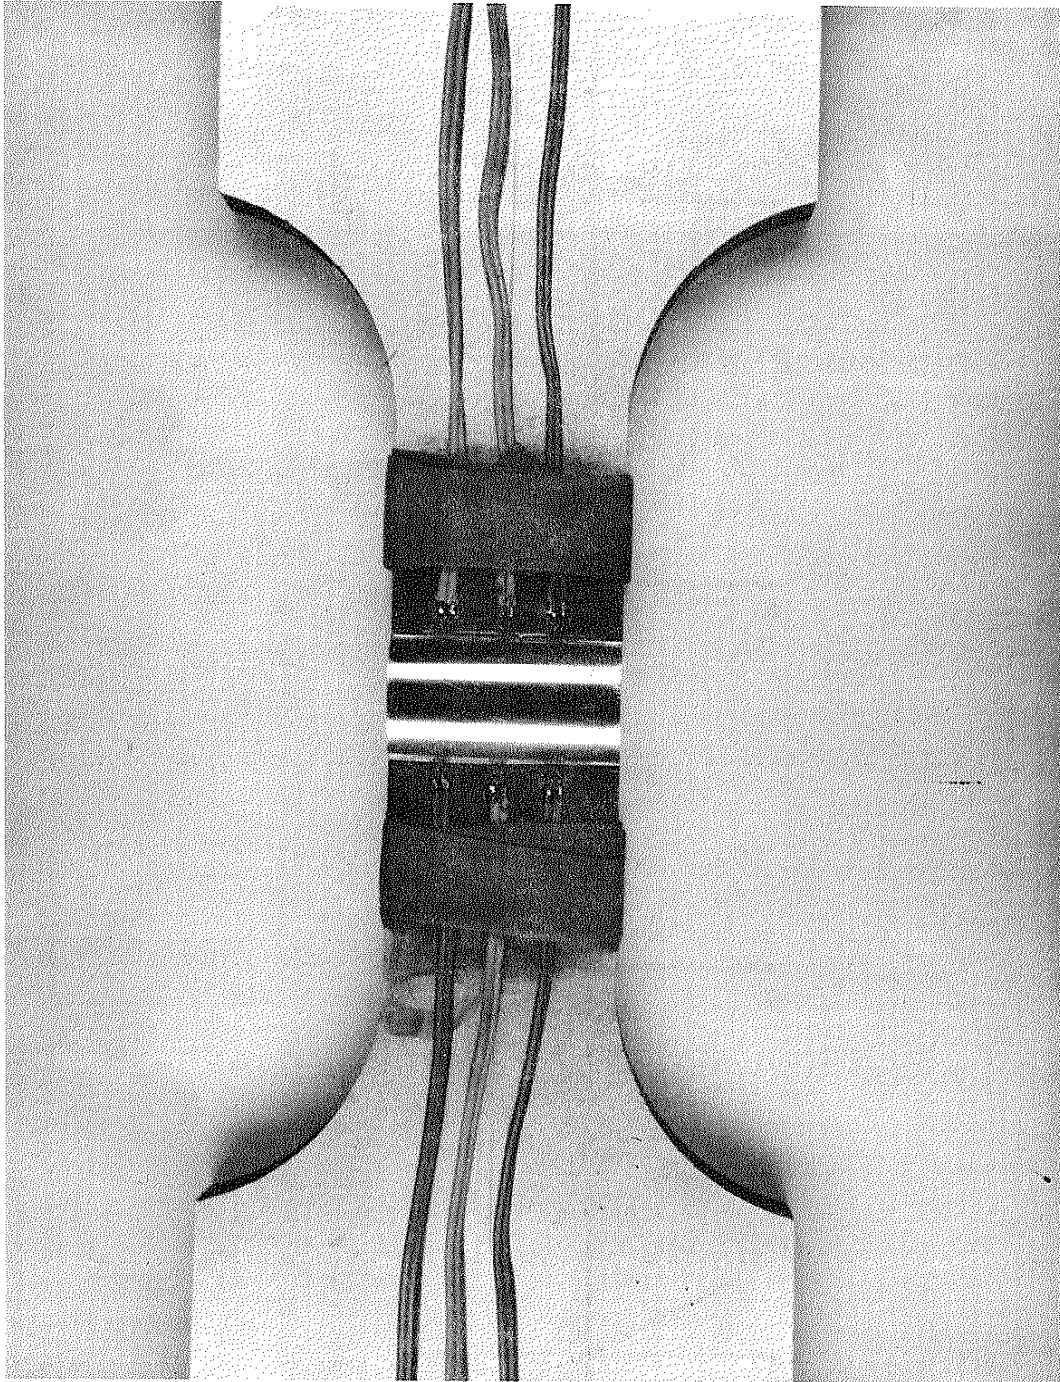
Simulated Weld Specimen with Six Miniature Strain Gages
